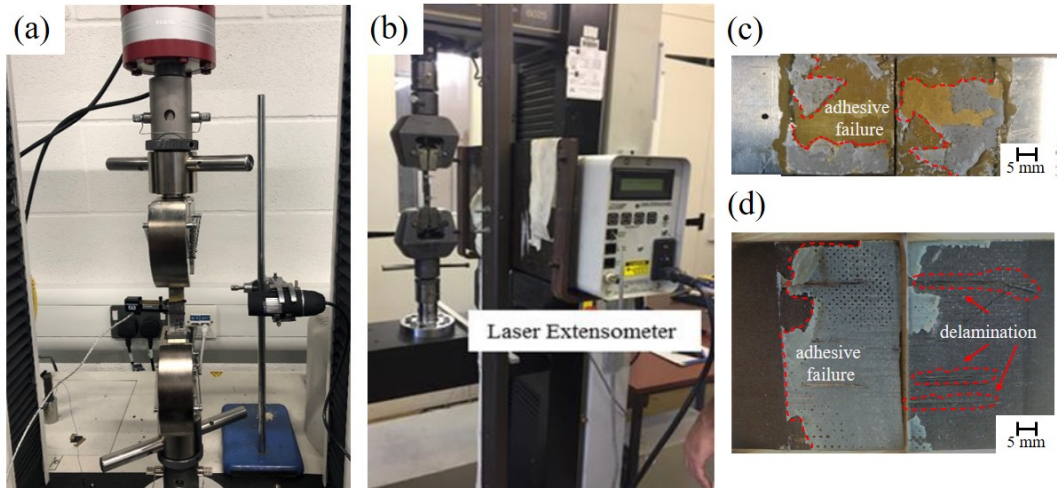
The setup of the test machine with (a) mechanical extensometer and (b) laser extensometer, and the failure of identical (c) aluminium joints and (d) composite joints.
